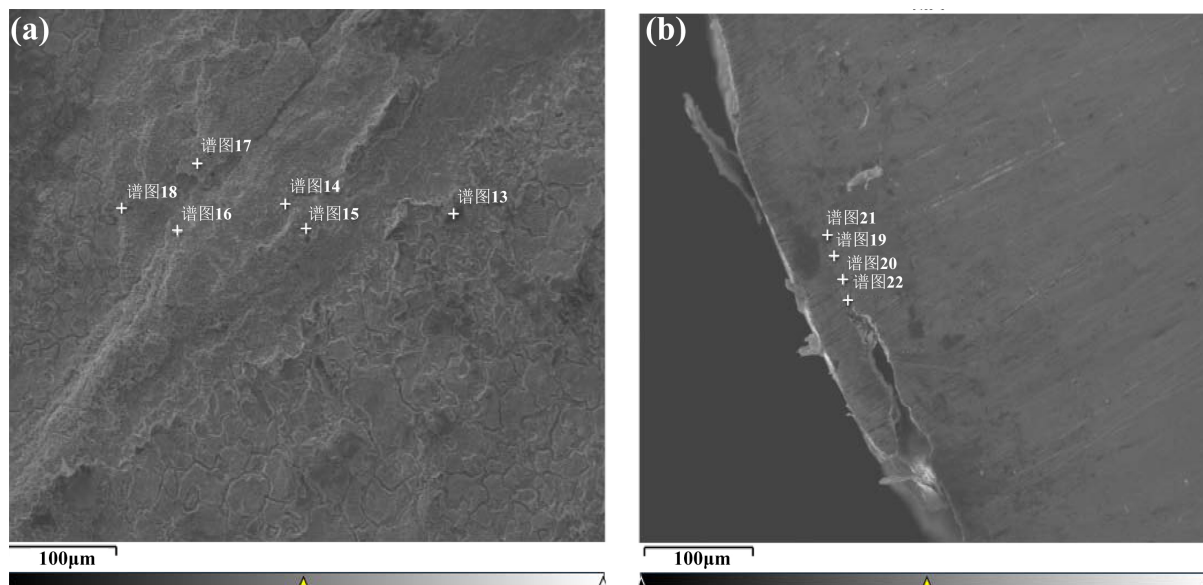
Surface and cross-sectional morphology of peeling defects on hot-rolled stainless steel plates
